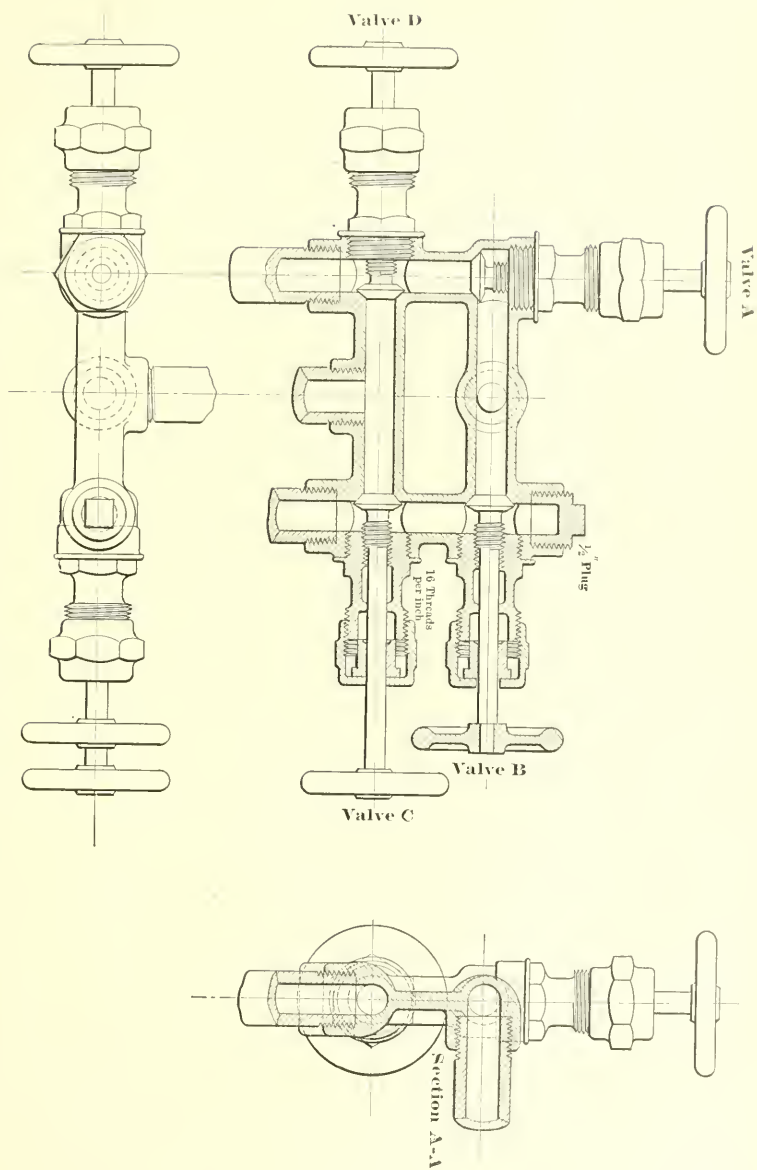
REGULATING DEVICE FOR TESTING MACHINE. SCALE 1-3.
